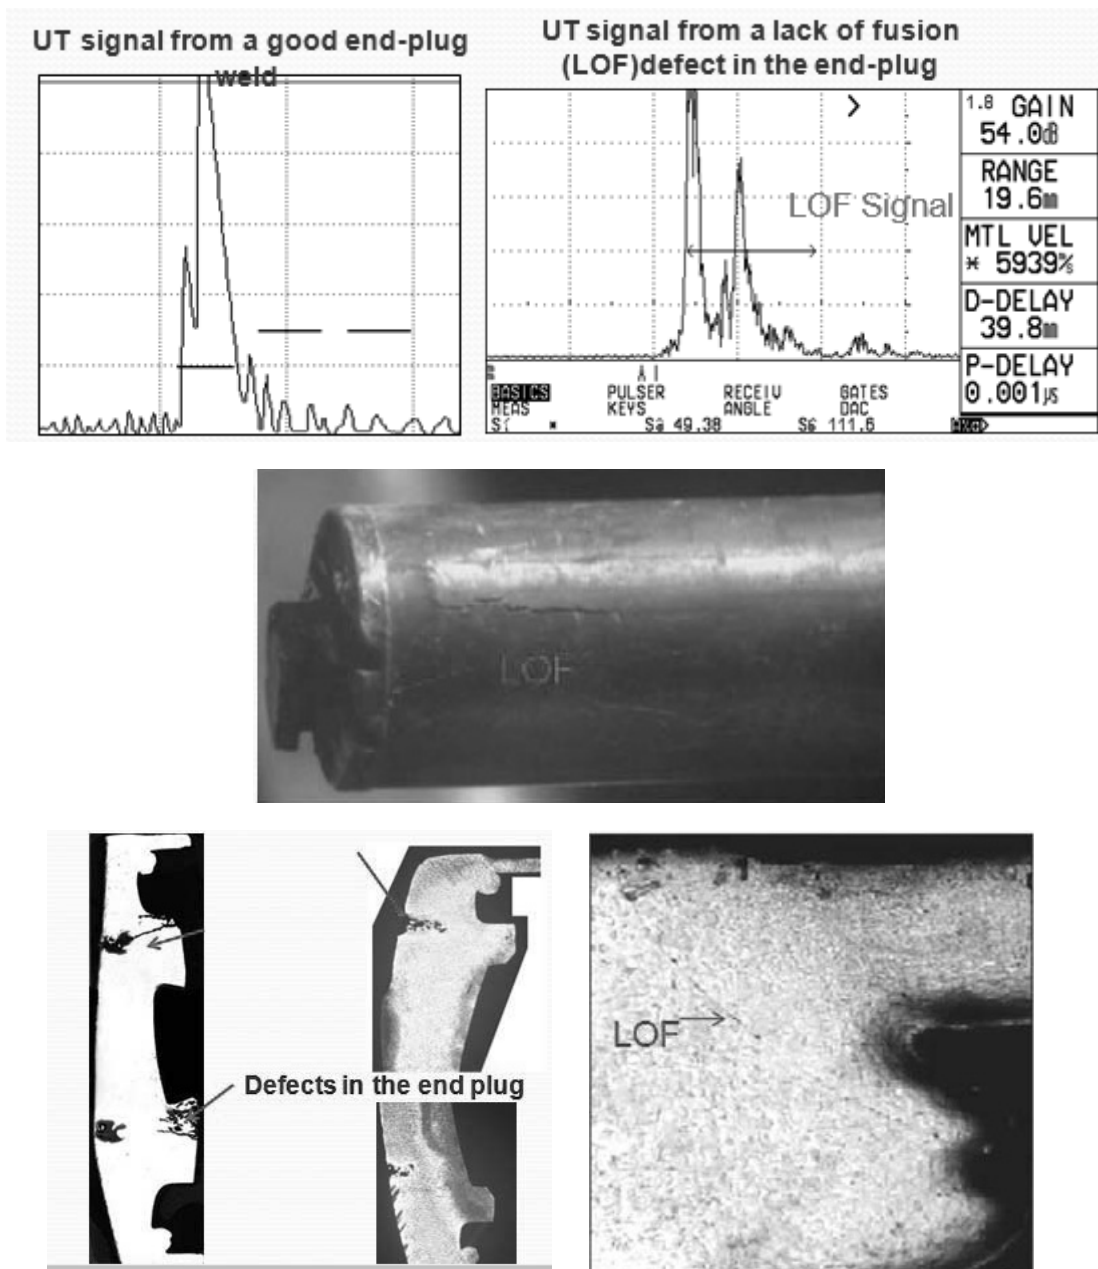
Lack of fusion (LOF) defect and ultrasonic (UT) signal for the same in by brazing resistance - welded end plug welds of irradiated PHWR fuel element .
